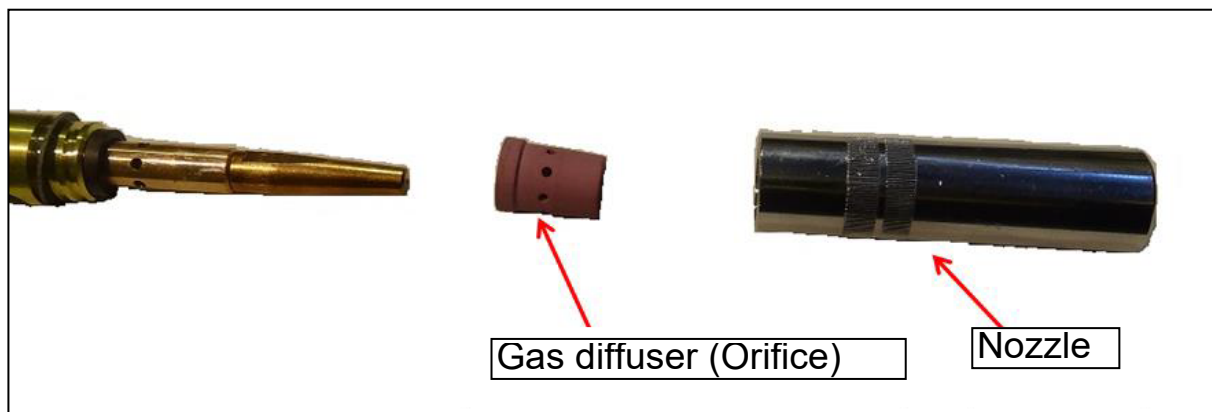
(a) Removing the gas diffuser and the nozzle
